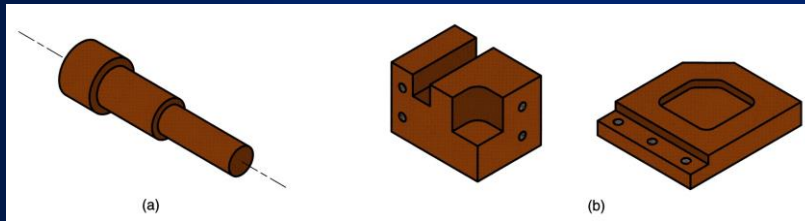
Machined parts are classified as: (a) rotational, or (b) nonrotational, shown here by block and flat parts
